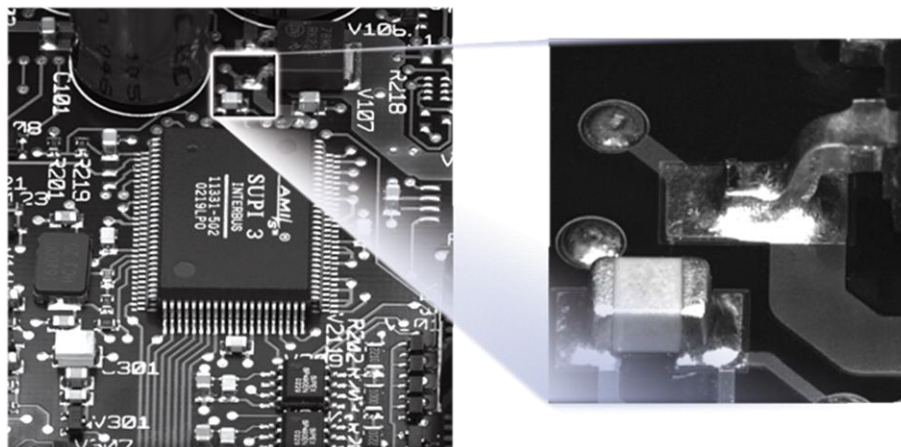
Scene from optical inspection of PCB [9]
